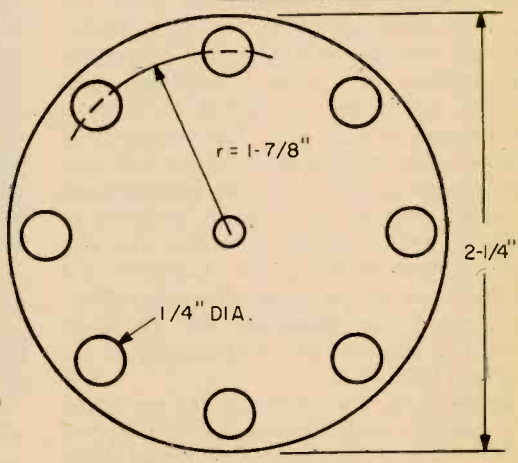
DETAIL SHOWS HOW INTERRUPTER DISC MOUNTED ON ROTOR SHAFT
